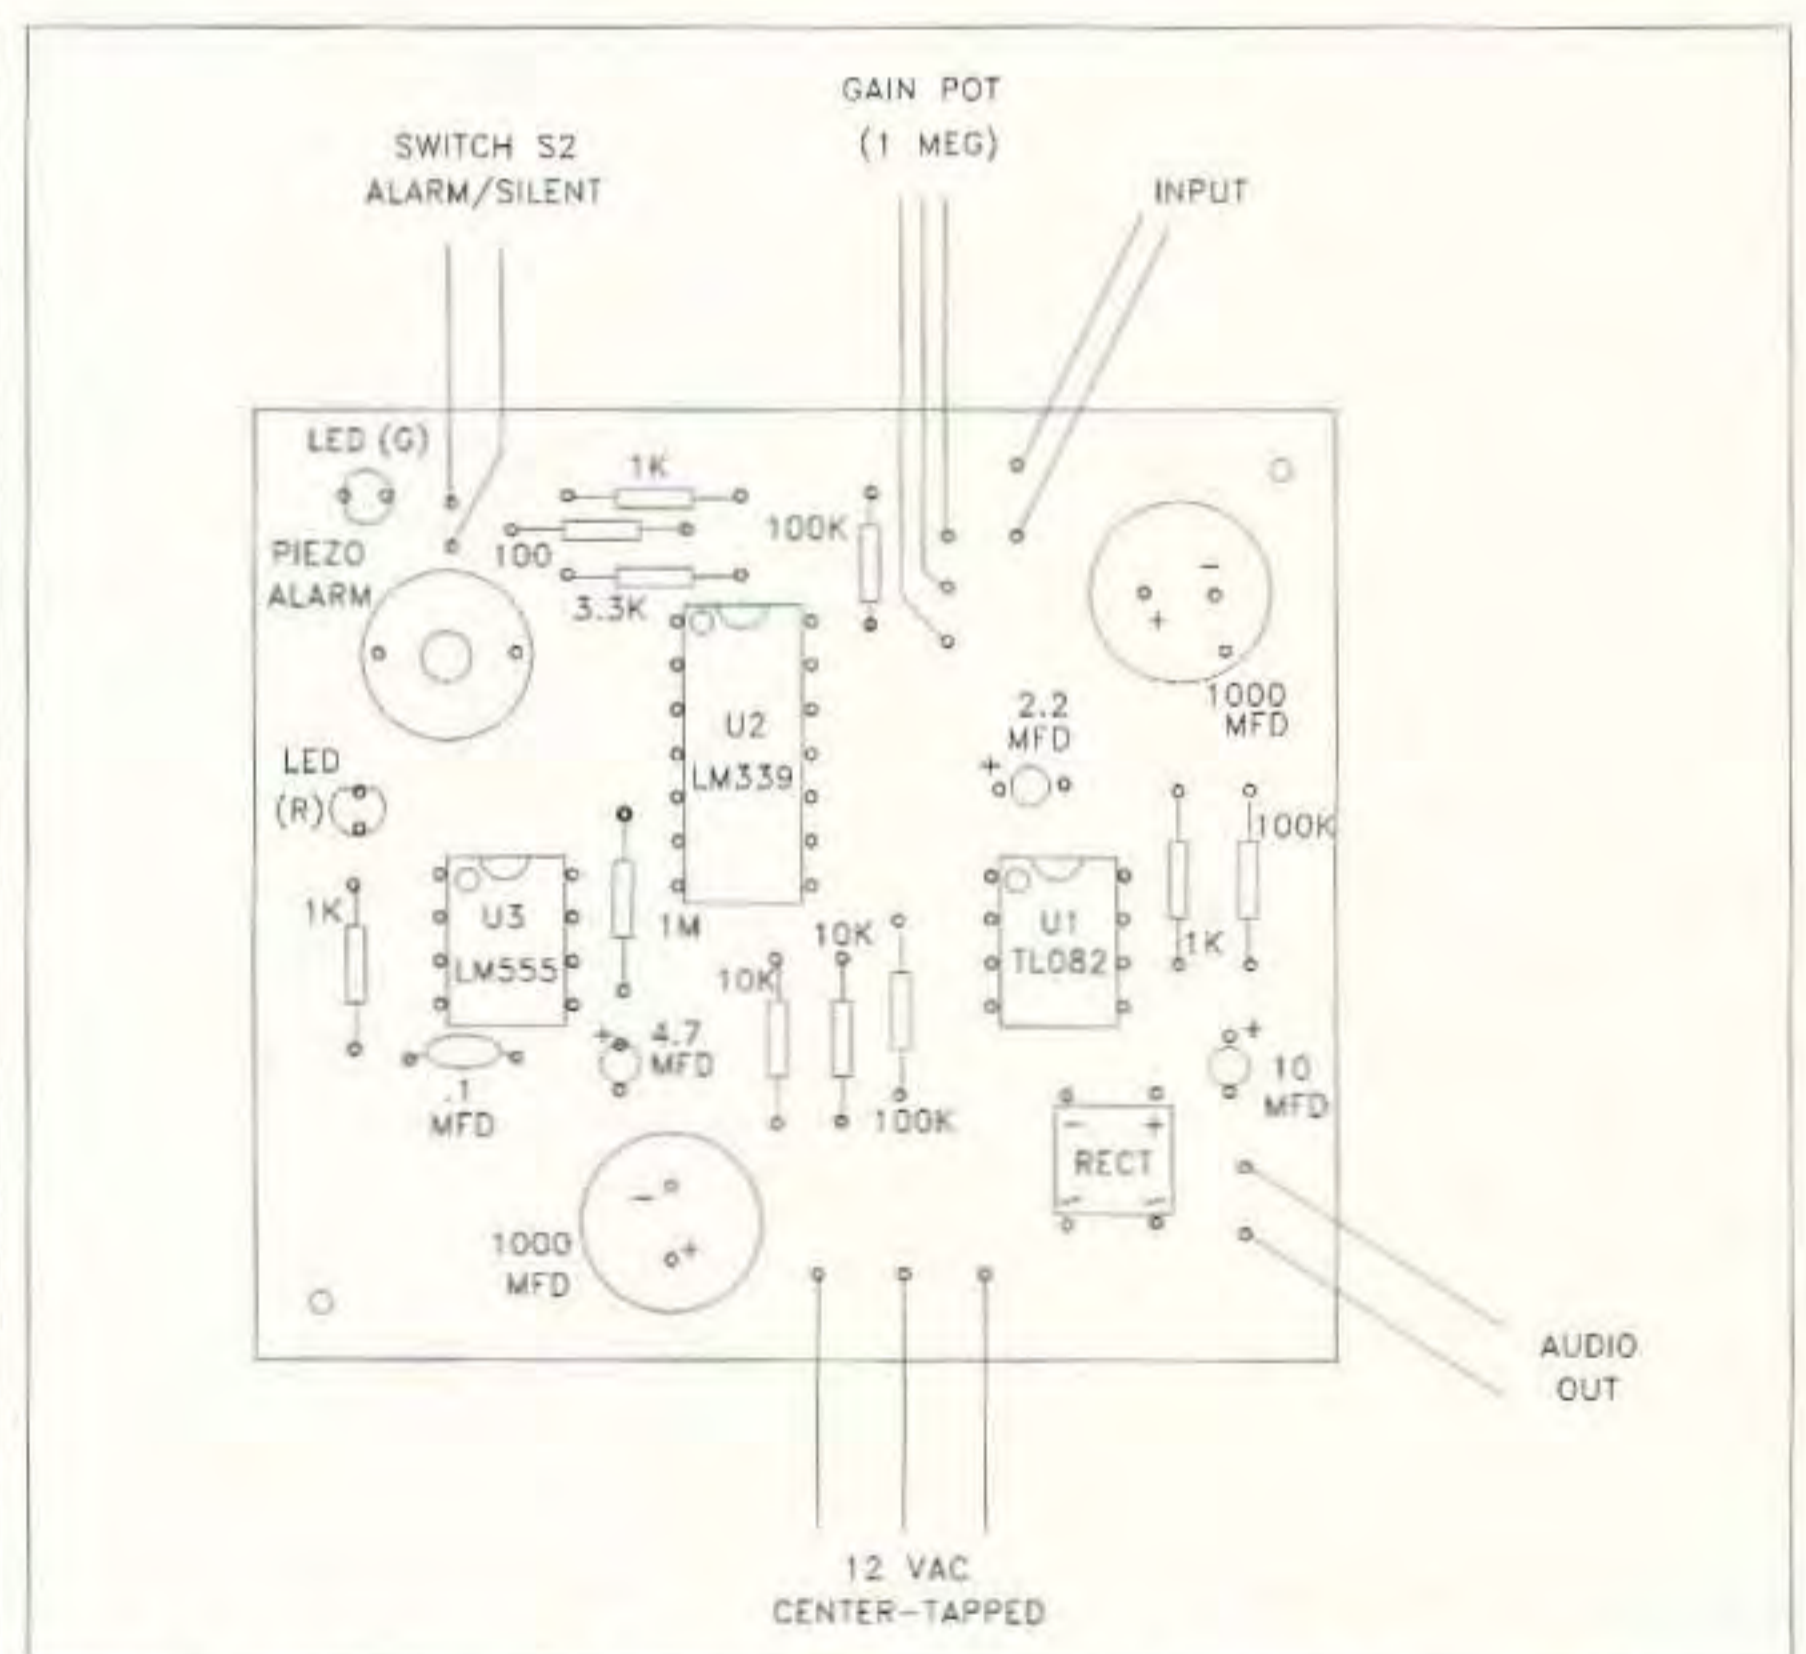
Parts layout for the magnetometer circuit board. Be sure to orient the components as shown.
